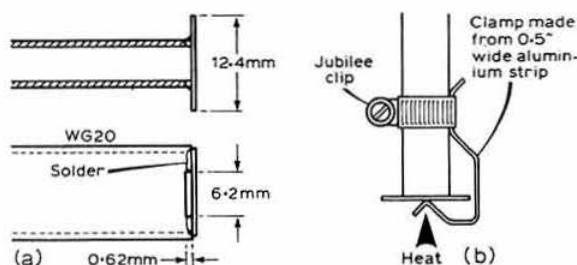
(a) Constructional details of the 24GHz dish feed. (b) The clamping arrangement used to hold the end disc in place during soldering
